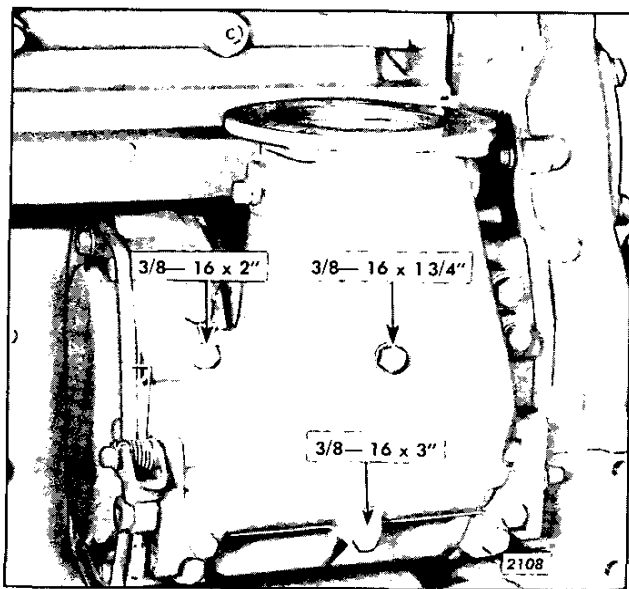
Location of Air Shutdown Housing Mounting Bolts (In-Line Engines)
